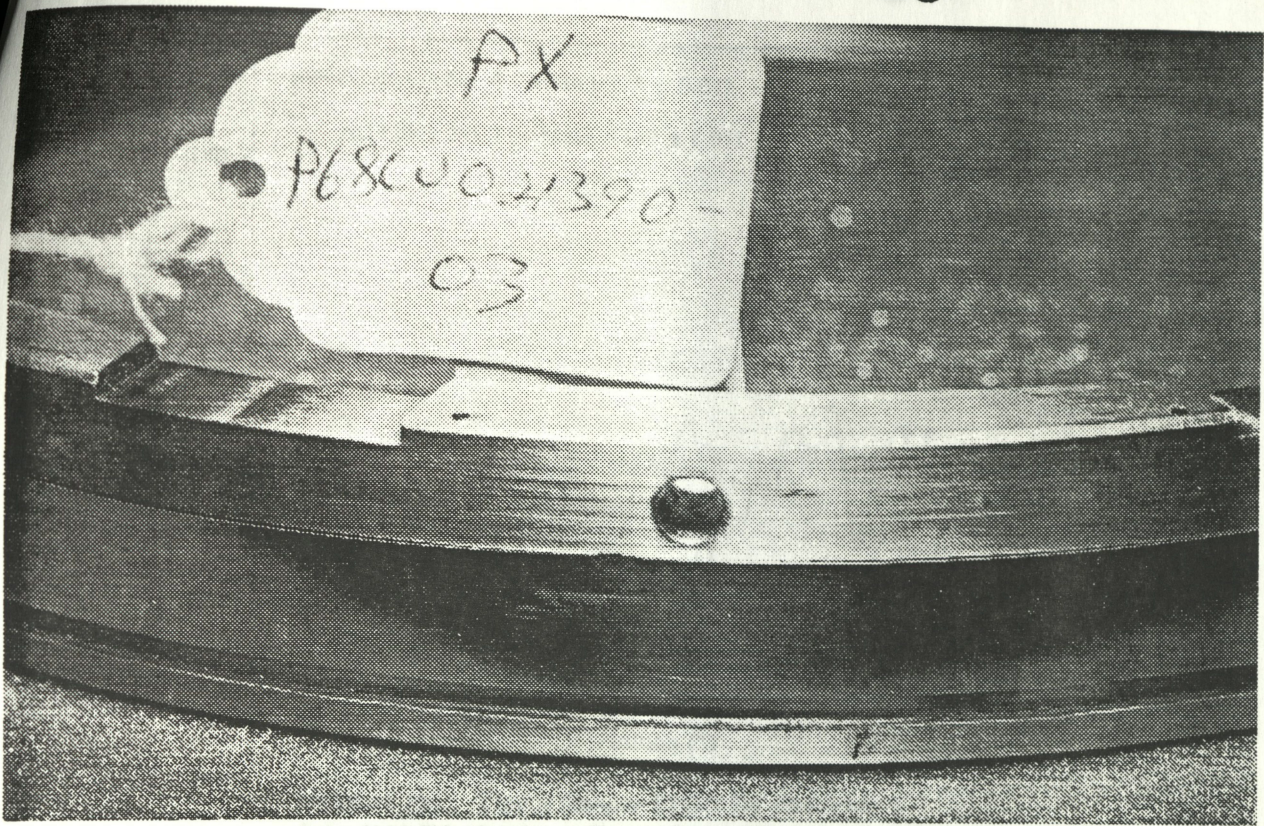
Lexan Test Ring Showing Single-edge Tack Welding of Stainless Steel Band
